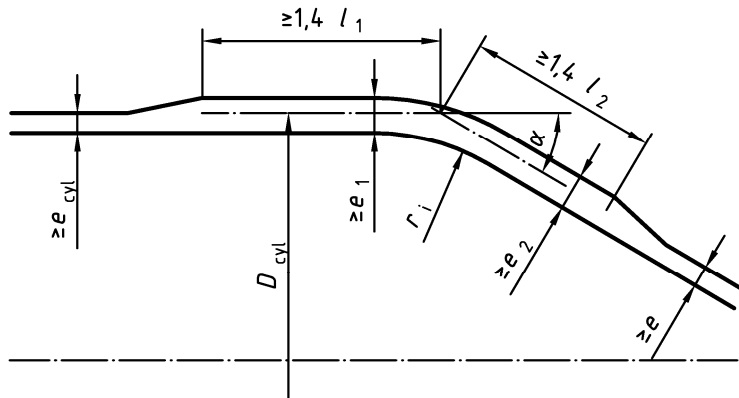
Geometry of cone/cylinder intersection with knuckle – Large end
